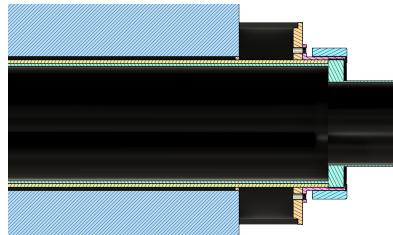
Thrust Retainer with the Thrust Plate cross-sectional view
